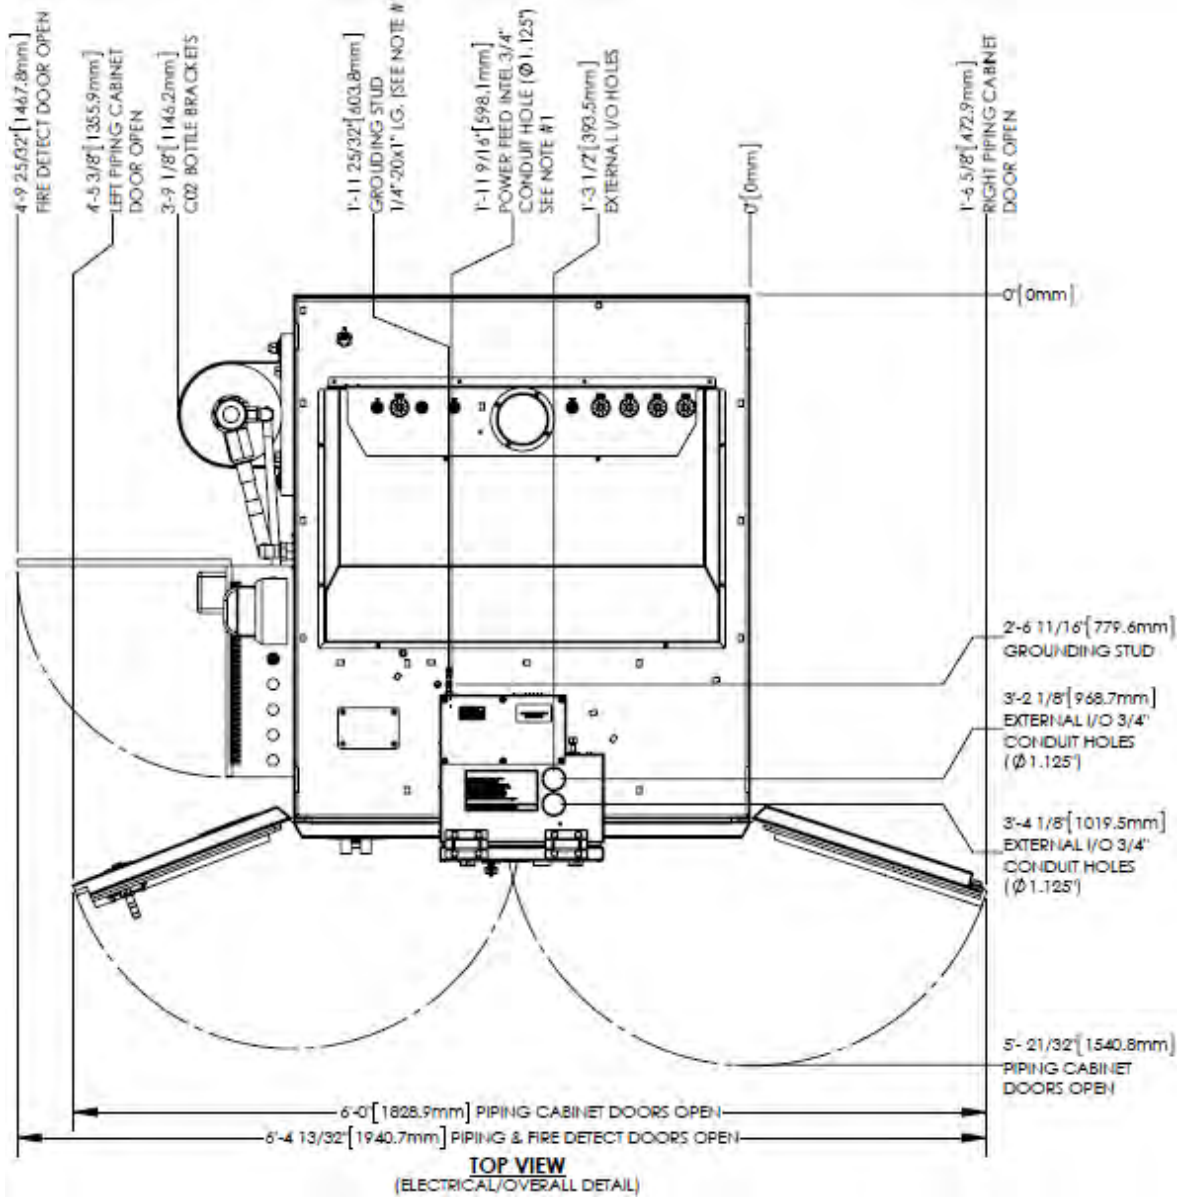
CHEMGUARD® GENIII BCD Piping Detail, Top View
